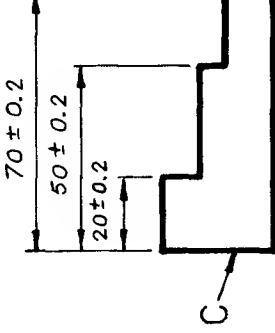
shows the drawing reduced to one quarter its original size, but the dimensions do not alter.
